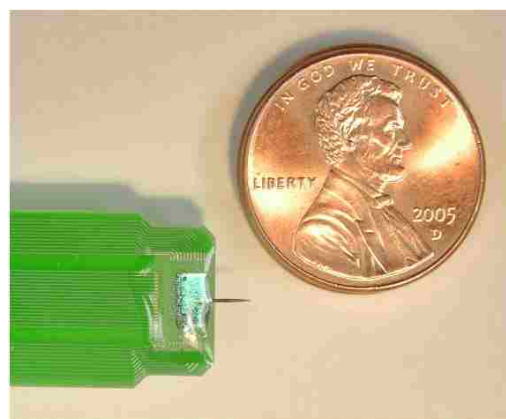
the ultrasonic transducer array after being bonded on a printed circuit board.
